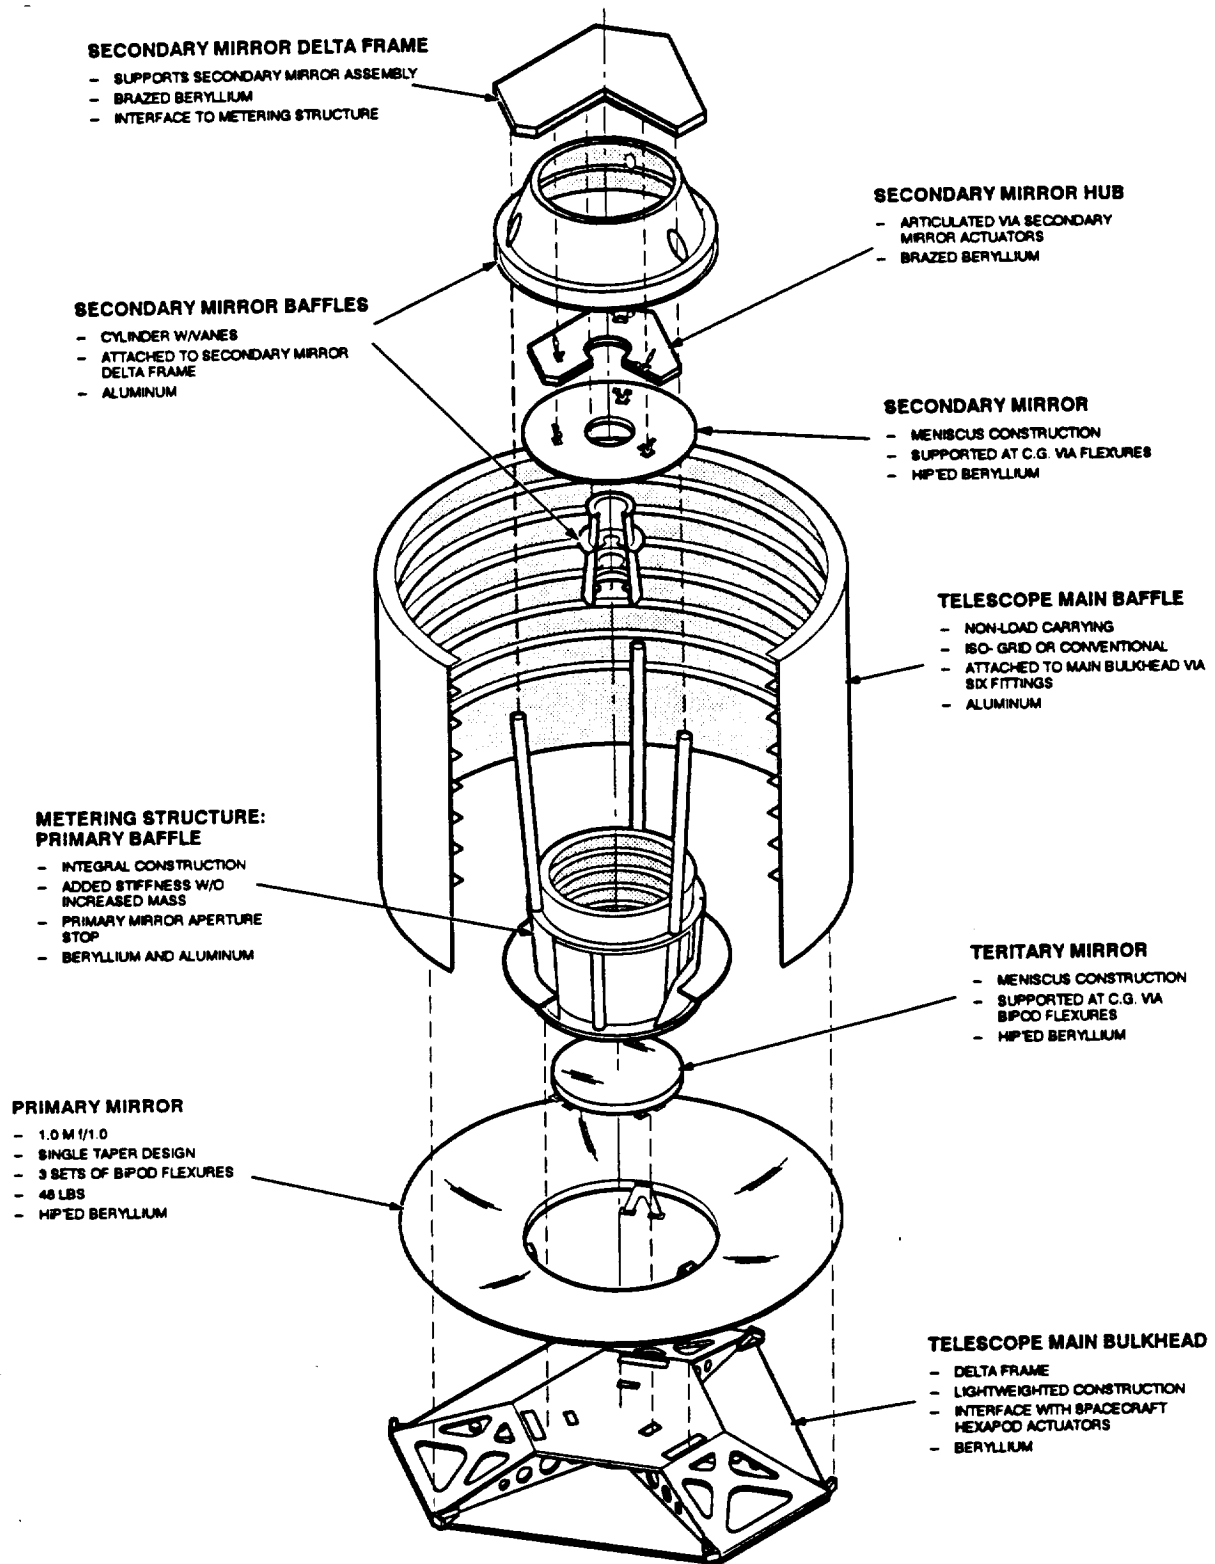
The "Exploded" View of the Lute Telescope Provide Insight into Assembly Sequences along with Material and Fabrication Techniques.
